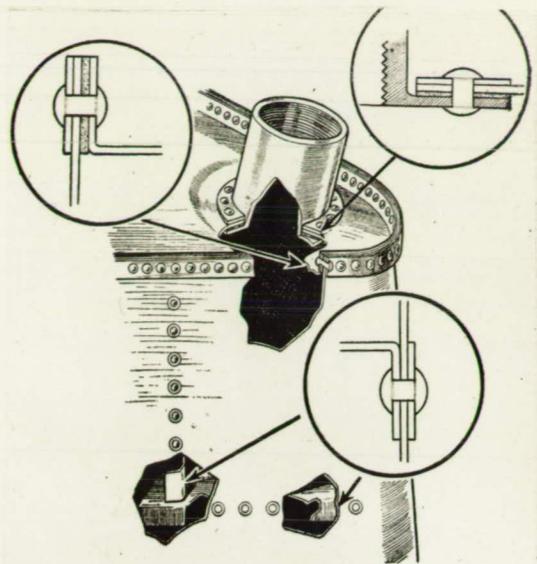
Poite riveted duralumin fuel tank. Upper left, Top and bottom joints: sheet of varnished paper between the end and an exterior reinforcing strip of duralumin. Upper right, Attachment of cocks, necks, outlets, etc: interposed paper ring and duralumin reinforcing ring. Below, Attachment of partitions, each rivet provided with a washer. Rivets very close. Thickness of walls exaggerated for sake of clearness.
